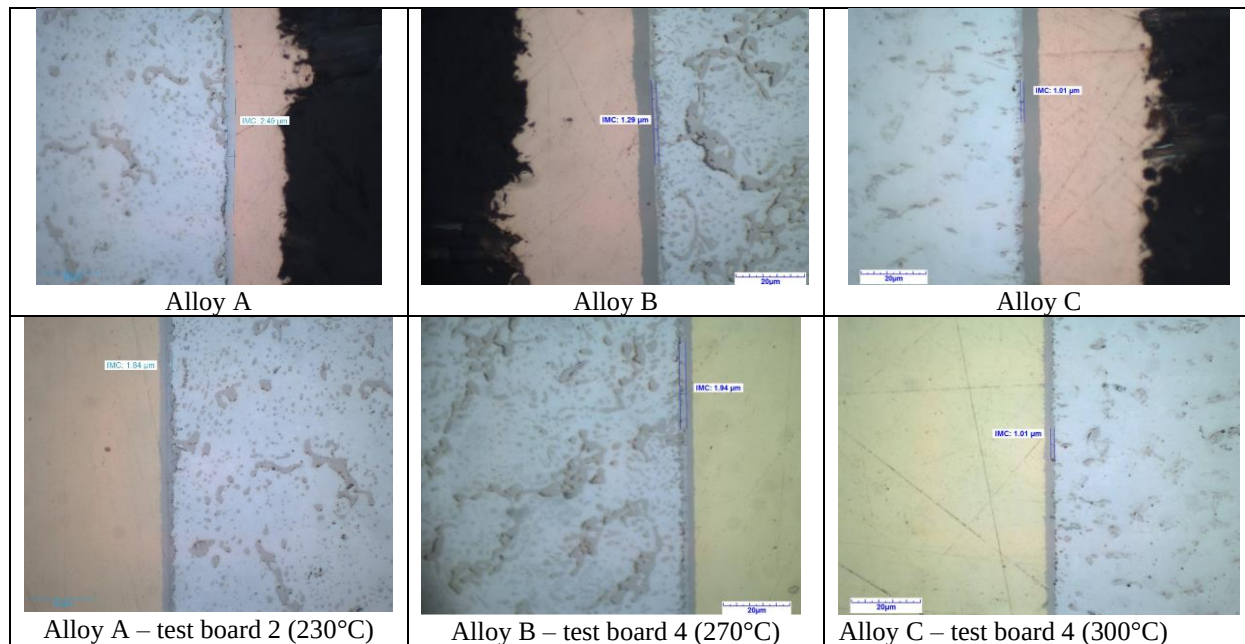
Cross sections barrel-solder (top) and pin-solder (bottom).
